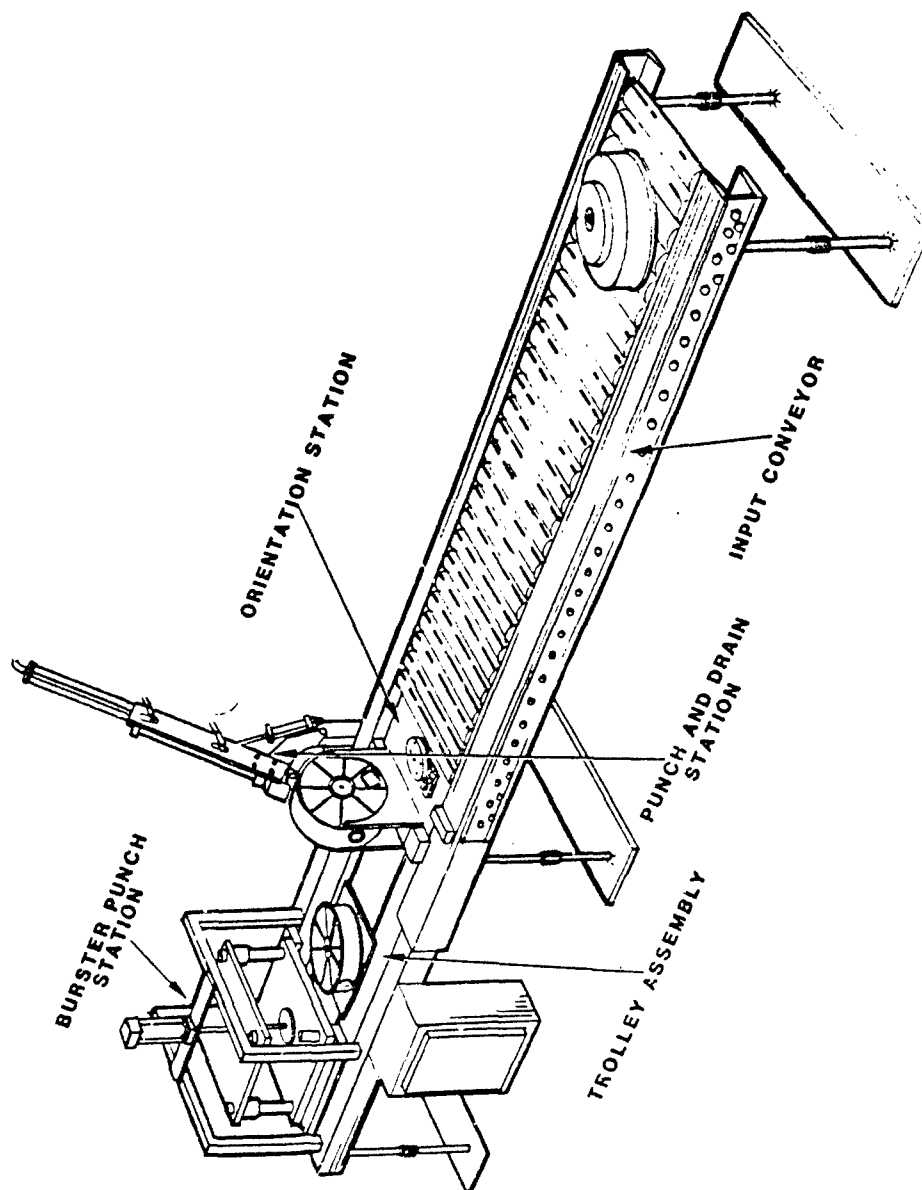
MINE DISASSEMBLY MACHINE (MIN).
